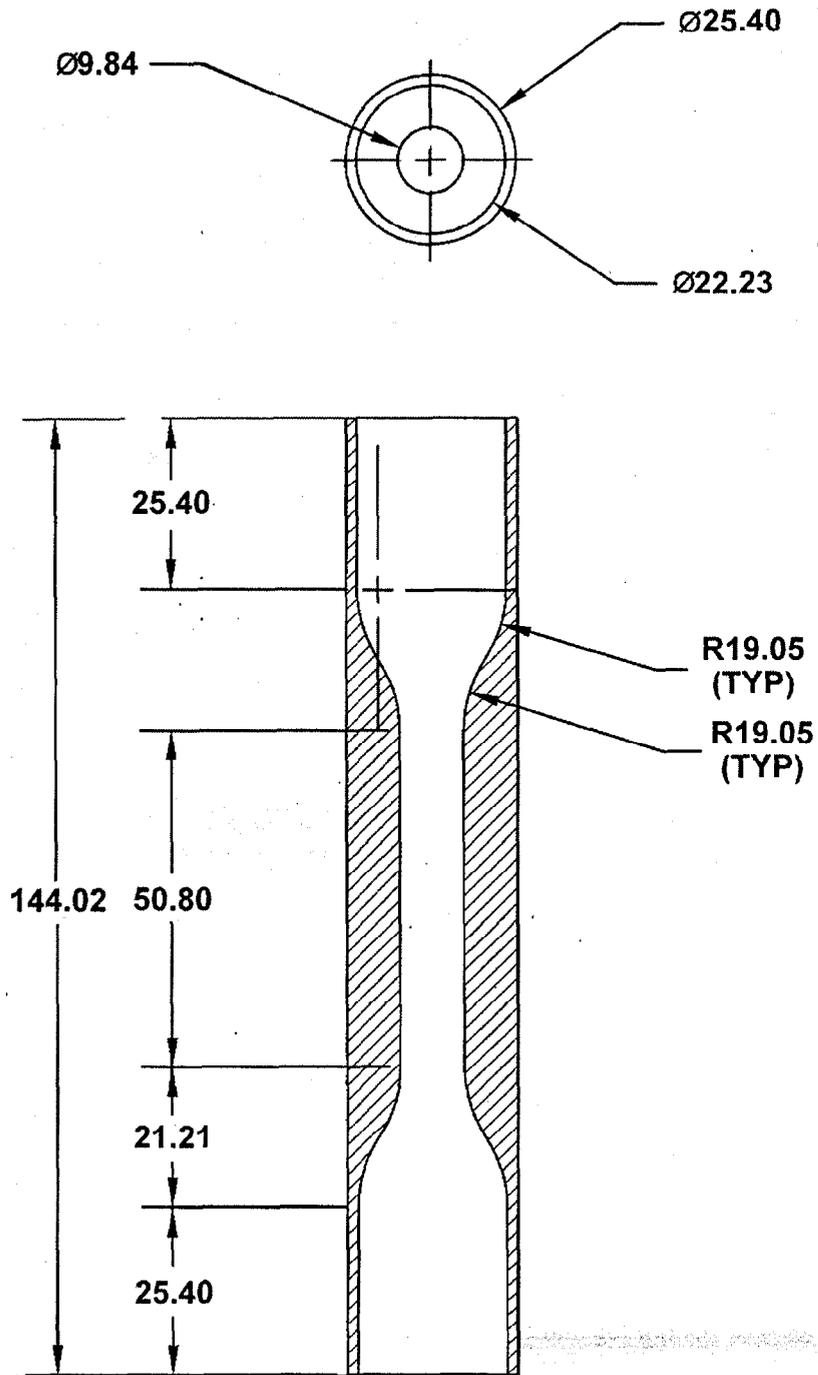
Detailed design (dimensions in mm) of reduced section in the TCLs.
